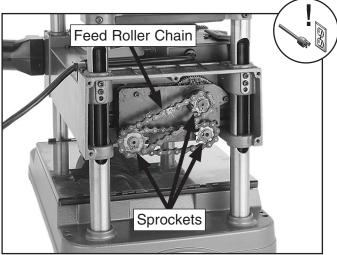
Cutterhead elevation leadscrews and feed roller drive chain exposed for lubricating.
